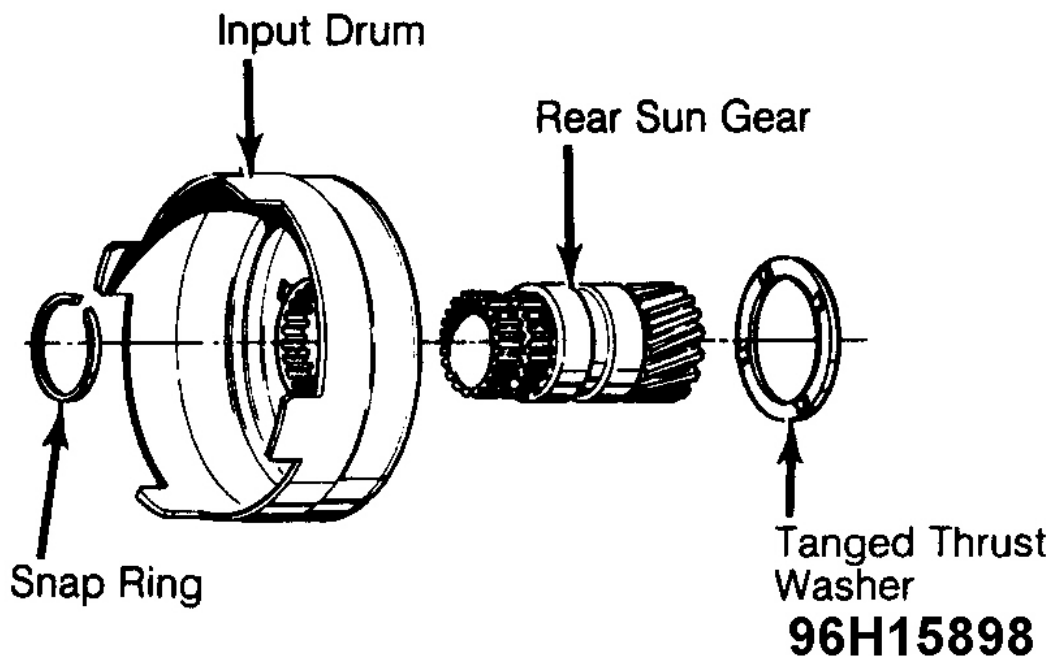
Disassembled View of Rear Sun Gear & Input Drum Assembly
